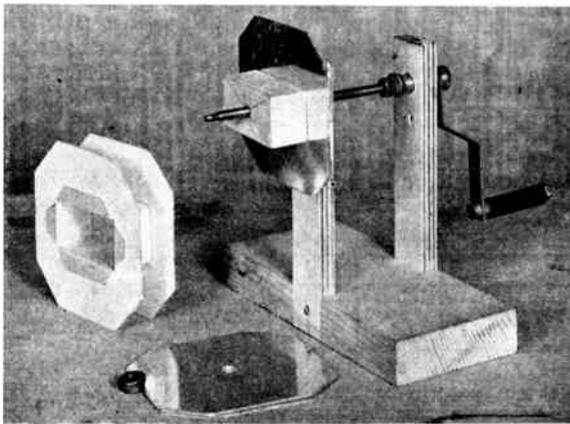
A SIMPLE WINDER FOR WINDING COILS ON TRANSFORMER BOBBINS.
